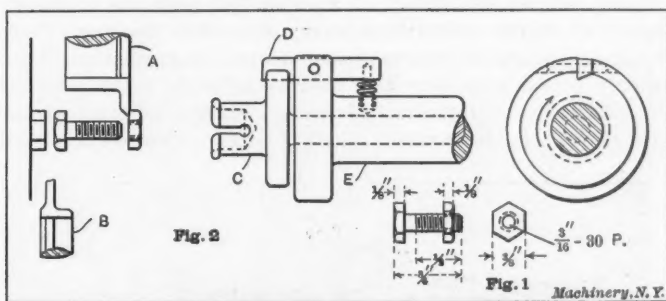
Nut and Bolt to be made and assembled. Fig. 2. Method of Applying the Circular Tools and Construction of the Carrier or Assembling Tool
